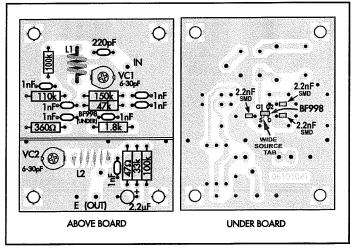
the PC board assembly has the board supplied with plated through holes, therefore component leads need only be soldered from the bottom side.
